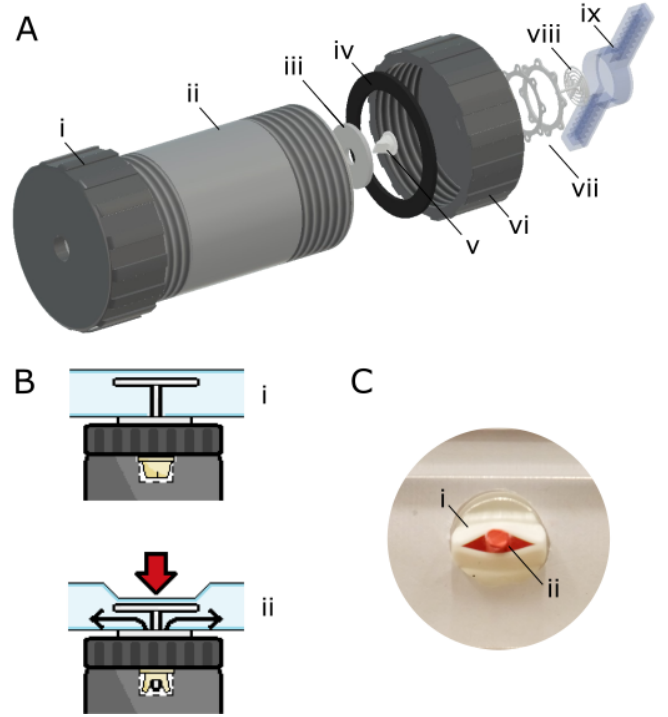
Schematic of the PRR unit design. A) Exploded view diagram of the PRR unit. i) PVC threaded cap with hole for inlet. ii) PVC threaded pipe. iii) Acrylic disk for mounting the valve. iv) Rubber gasket. v) Silicone duck billed valve. vi) PVC threaded cap with hole for pin entry. vii) Mounting rings for the soft robotic actuator: one silicone to bond to the robot, one acrylic to mount to the cap. viii) 3D printed pin with flanged base to bond to soft robotic system. ix) Soft robotic actuator, in this instance a pneu-net. B) Principle of operation of the PRR unit. i) The system is combined and sealed with screws and silicone adhesive (with cut away to view valve). ii) The system is stimulated by pushing the pin into the PRR unit and allowing air to flow into the pneumatic network within the robot (with cut away to view valve opening). C) Front view of the valve mounted in the acrylic disk, with example of the pin opening the valve aperture. i) Soft valve. ii) A pin protruding through the valve aperture. A red pin was selected for clarity.
